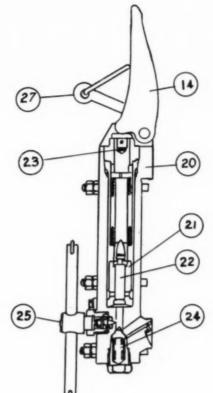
Pile driving mechanism seen in side elevation and longitudinal secton.
